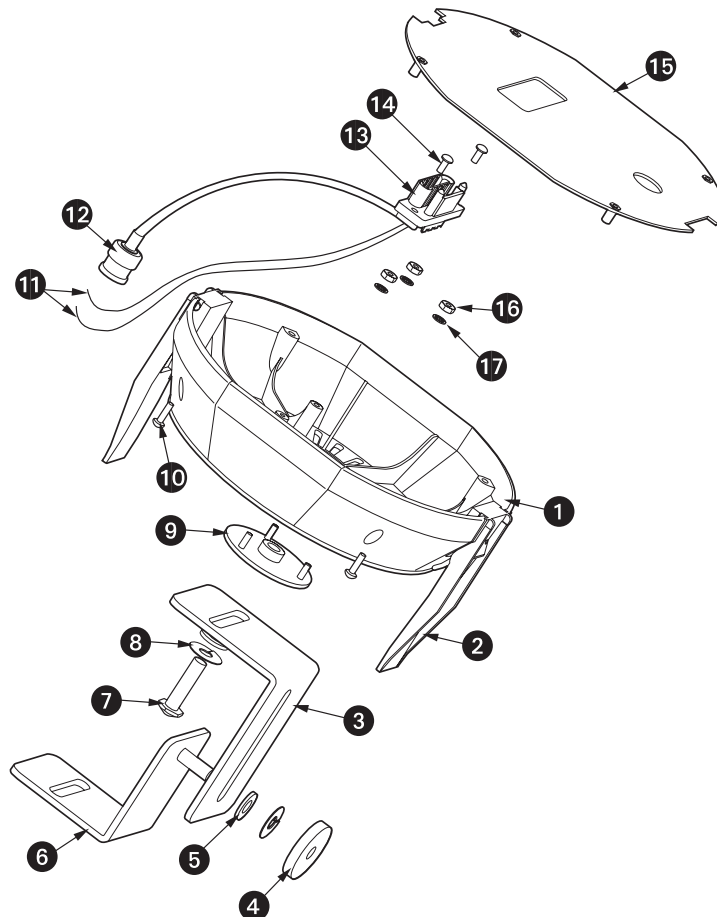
DD5-FM Fixed Mount Exploded Assembly Diagram
